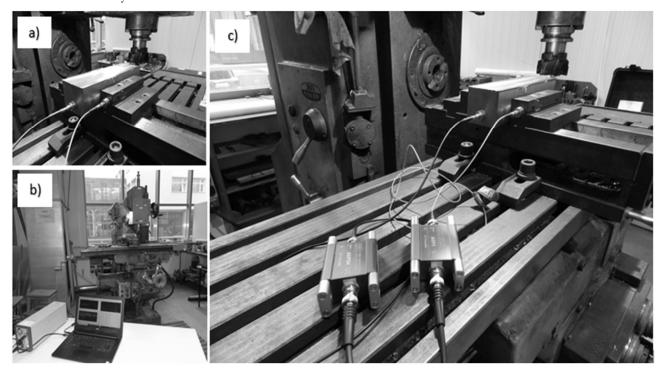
a) The workpiece with magnetically mounted AE sensors (model VS370) on the workpiece and on the machine vise jaw, prepared for milling with a cutter R390-063Q22-11H; b) Conventional (manual) milling machine with an acoustic emission measurement path; c) The workpiece clamped in the machine vise with AE sensors mounted directly on the workpiece and on the vise jaw, equipped with signal amplifiers
